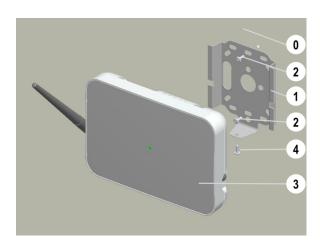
Figure 5 - Wall or Ceiling Mounting (Scheme)
